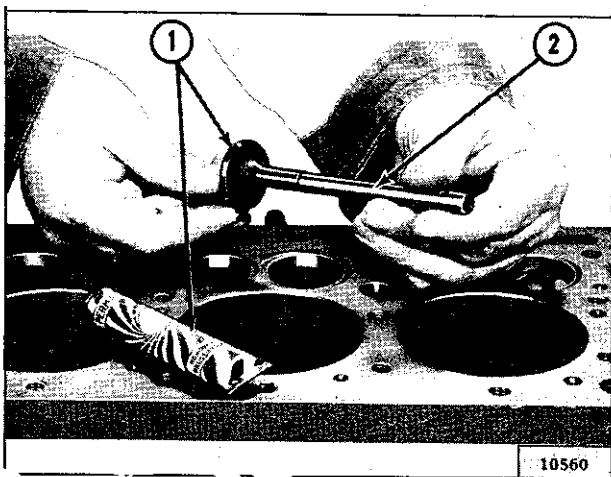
CHECKING FIT OF VALVE IN VALVE SEAT
